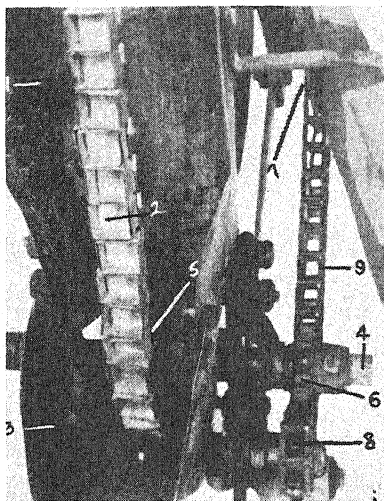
Close-up showing seeding mechanism of nursery space seeder. (1) Sheet metal trough; (2) seed cup; (3) sheet metal grain spout; (4) drive shaft, galvanized pipe, $\frac{7}{8}$ inch in diameter; (5) 6-tooth sprocket; (6) 7-tooth sprocket; (7) 15-tooth drive sprocket; (8) 6-tooth sprocket for tightening drive chain; (9) No. 25 drive chain.
